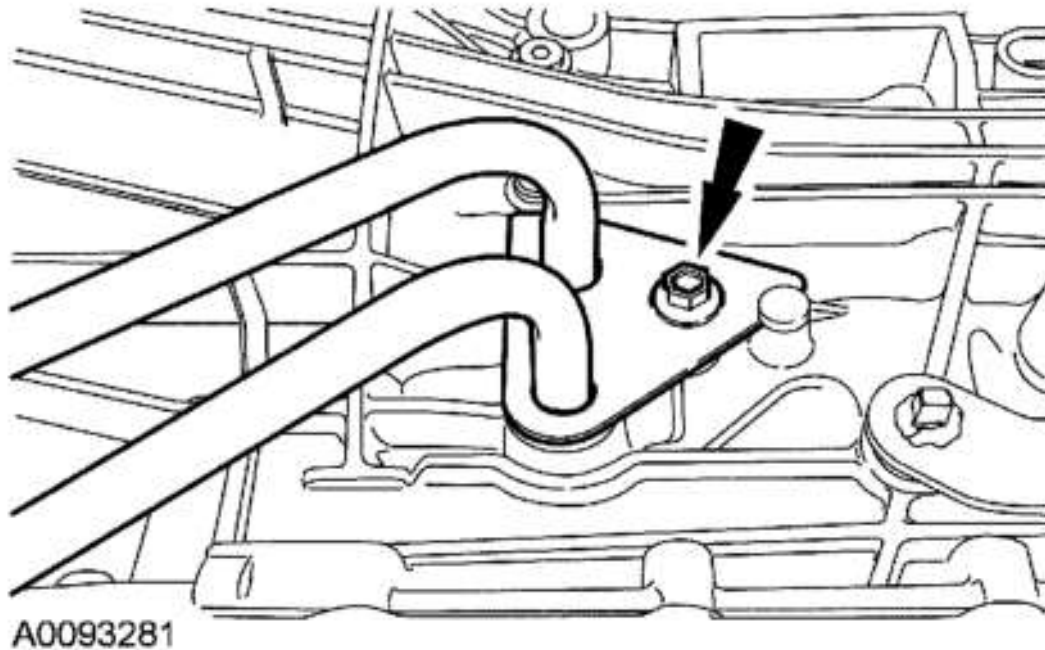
Removing Transmission Cooler Tube Bracket Bolt
